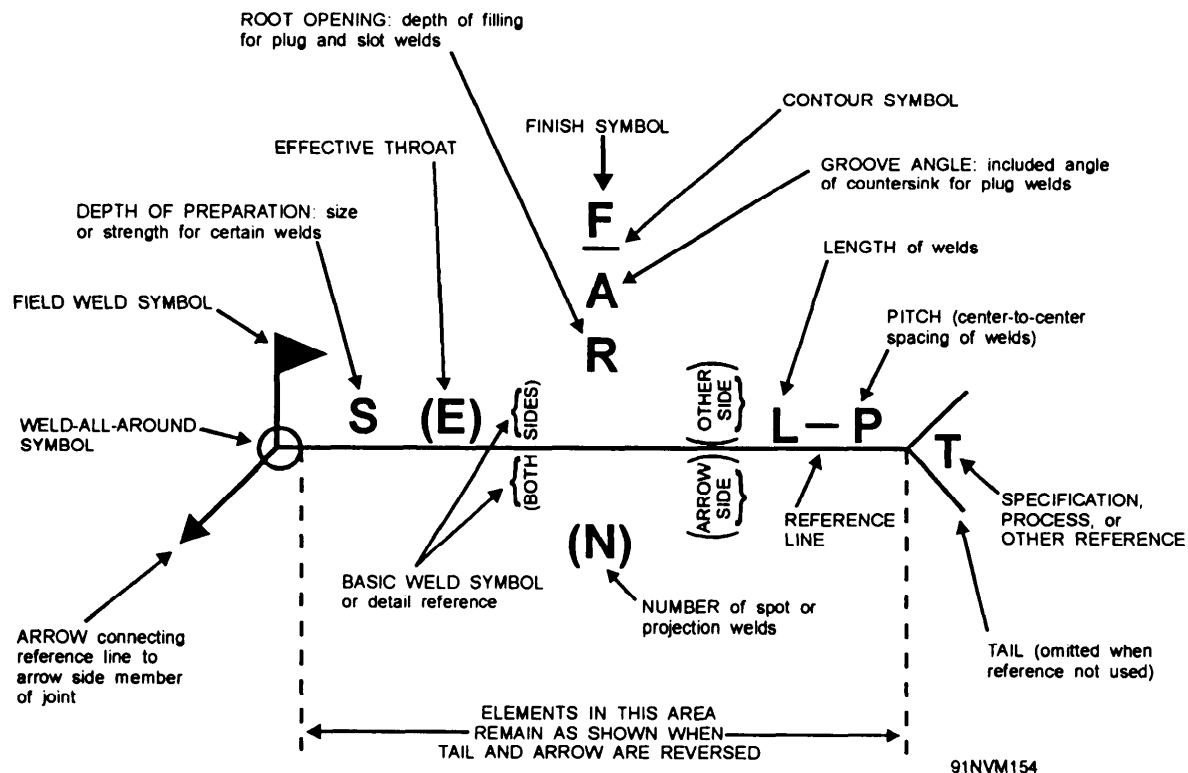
Standard location of elements on a welding symbol.
